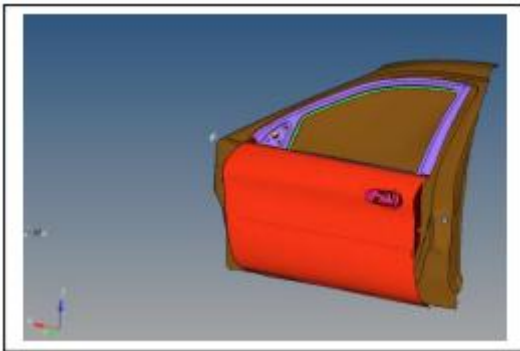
Assembly Model of Door Slam Test with Rigid Surface
